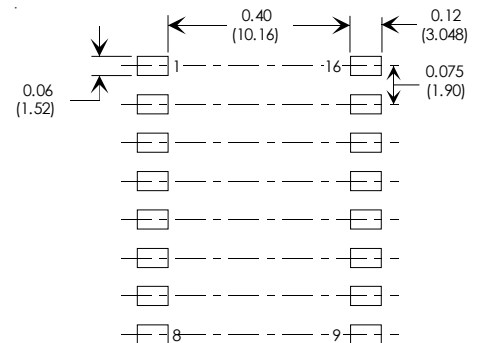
PHYSICAL DIMENSIONS IN INCHES (mm)
